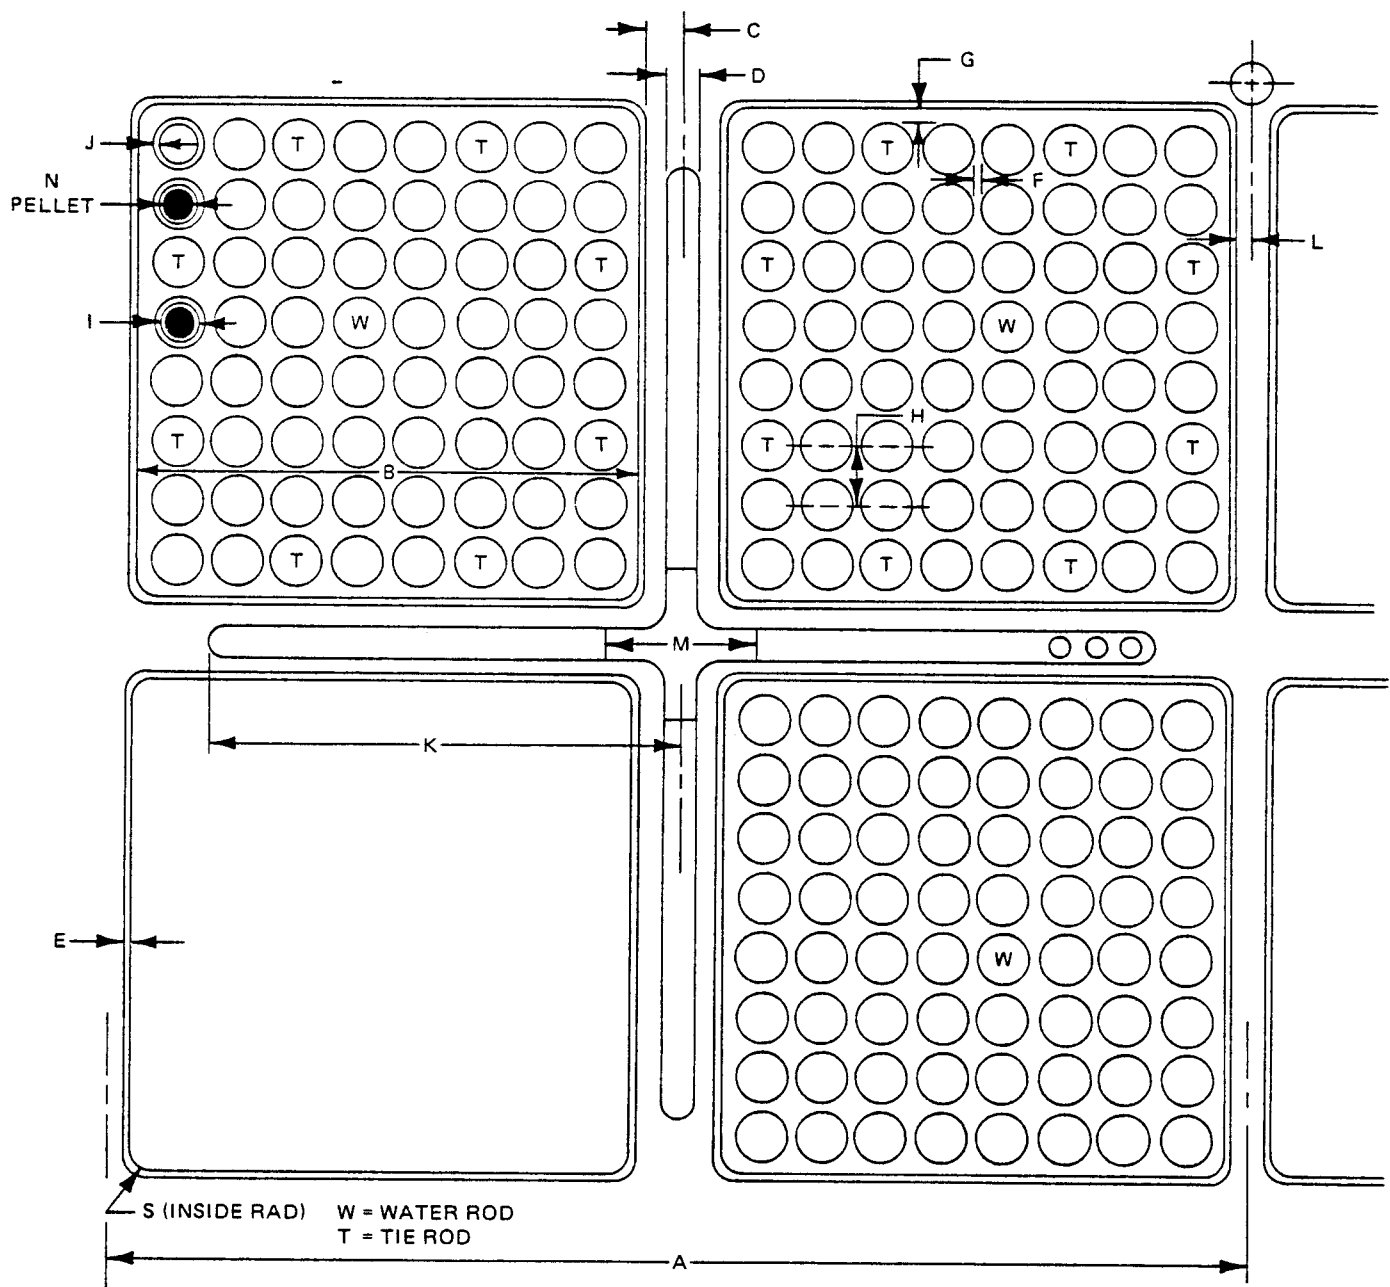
Reload-2 Fuel Assembly Lattice for 80-mil Channels
